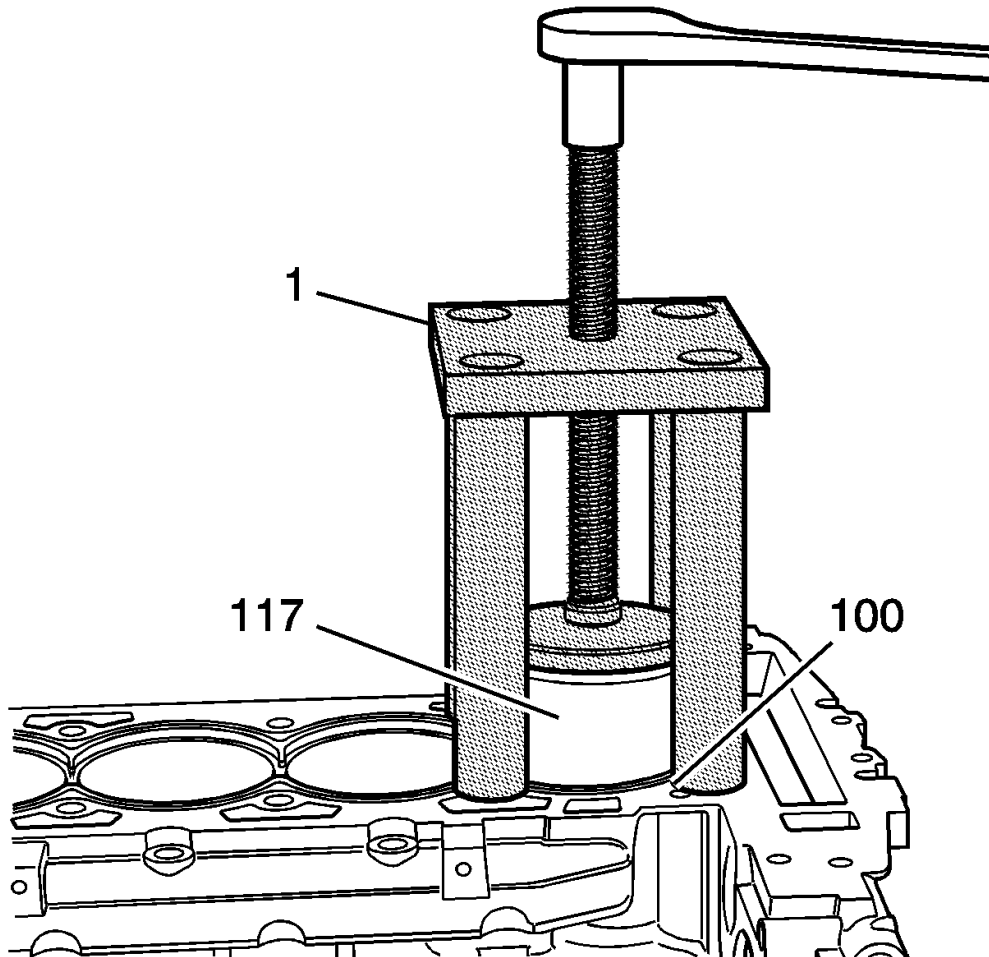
Installing Cylinder Bore Sleeve Into Engine Block Using Tool
